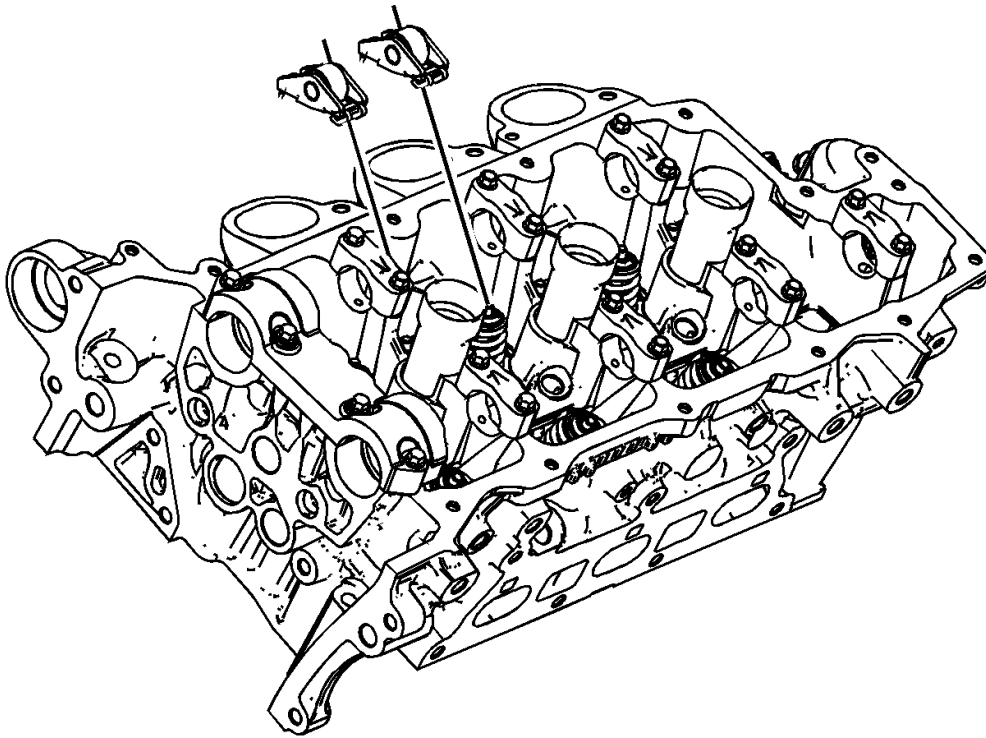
View Of Valve Rocker Arm - Left Side (LLT)
